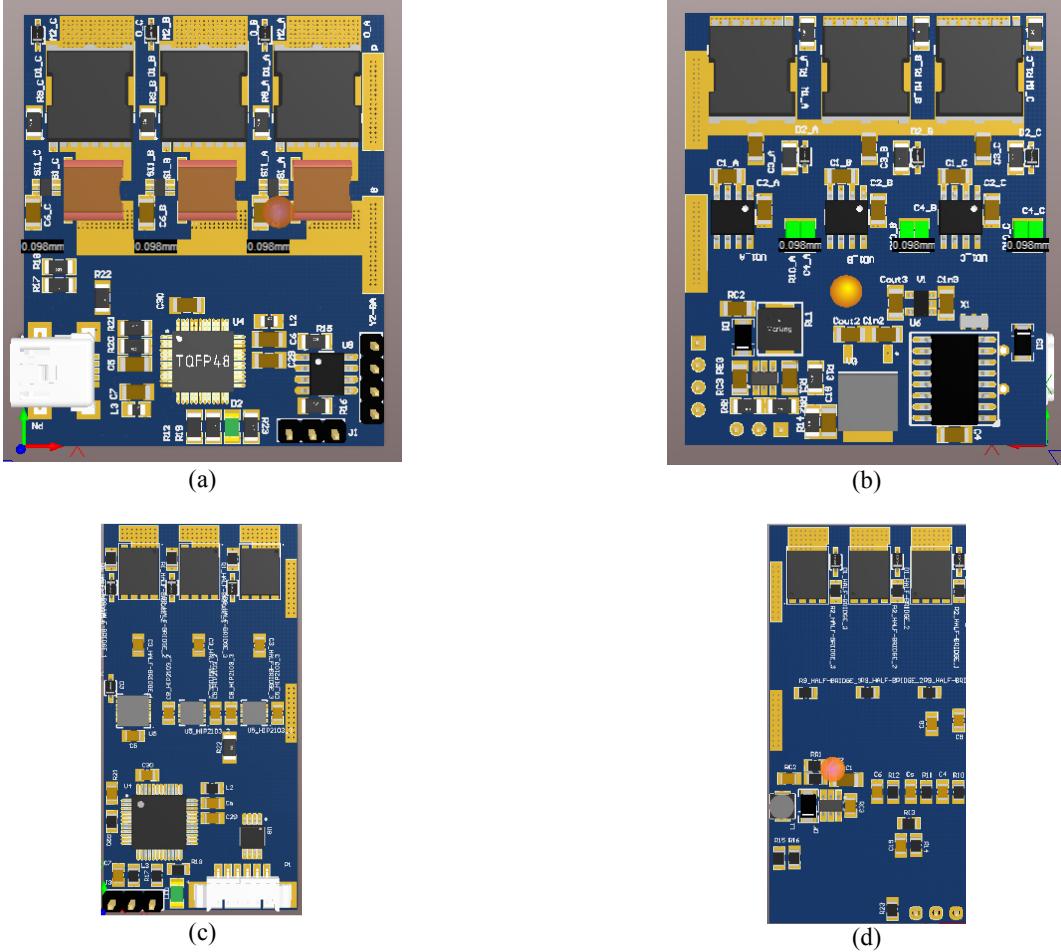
Views of the PCB motor drivers: (a) top and (b) bottom view for driver #1 and (c) top and (d) bottom view for driver #2.
